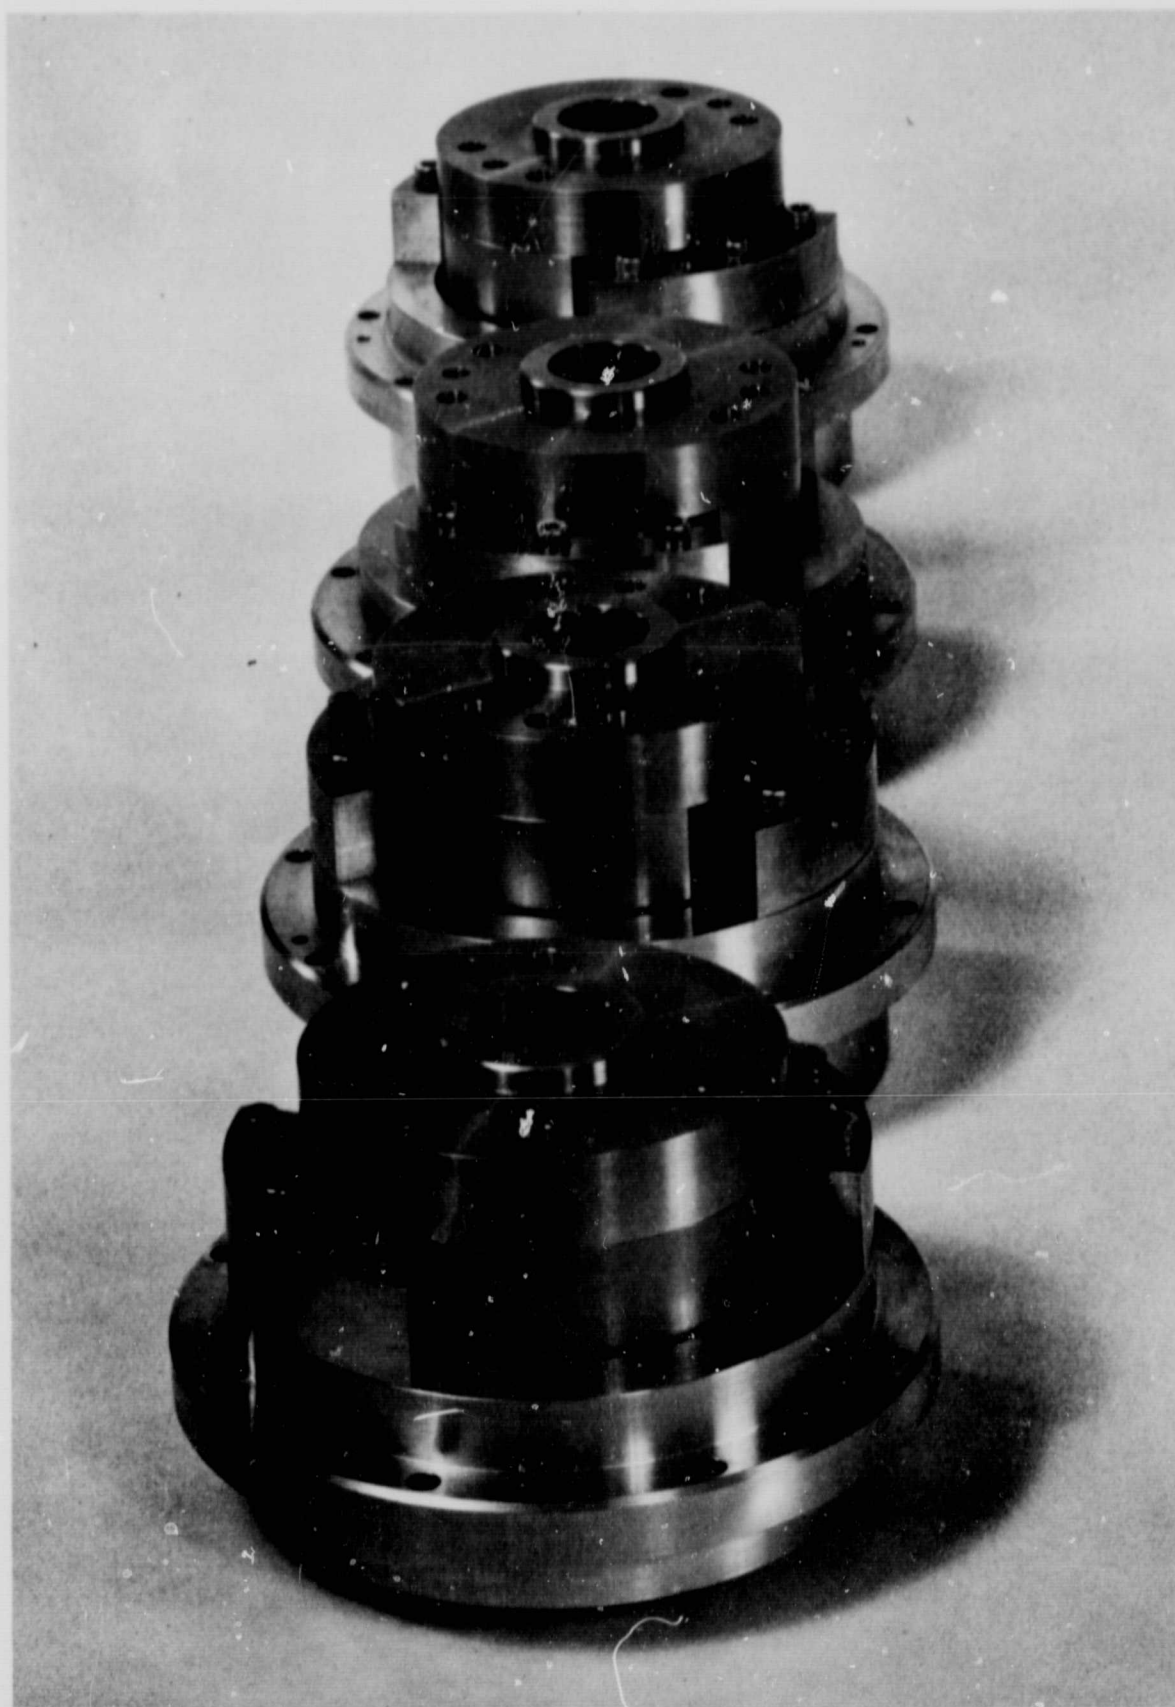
Flexure Pivot Assemblies for Pitch and Yaw Axes.
